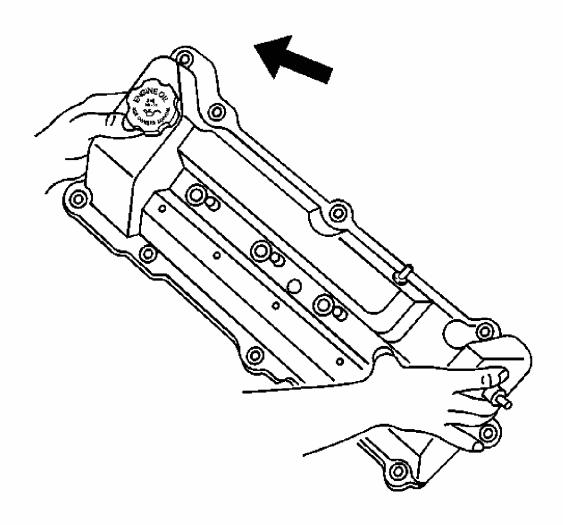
Identifying Camshaft Drive End of Camshaft Cover Courtesy of GENERAL MOTORS CORP.
